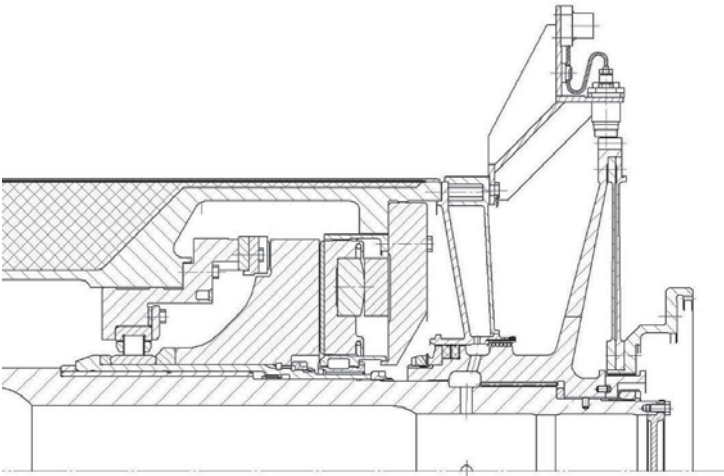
Combined support of power turbine of the Zorya-Mashproekt UGT25000 engine [20]
